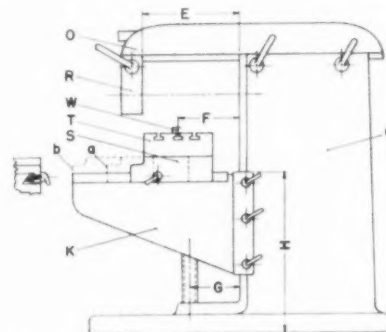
WANDERER MILLING MACHINE USED IN TESTS
